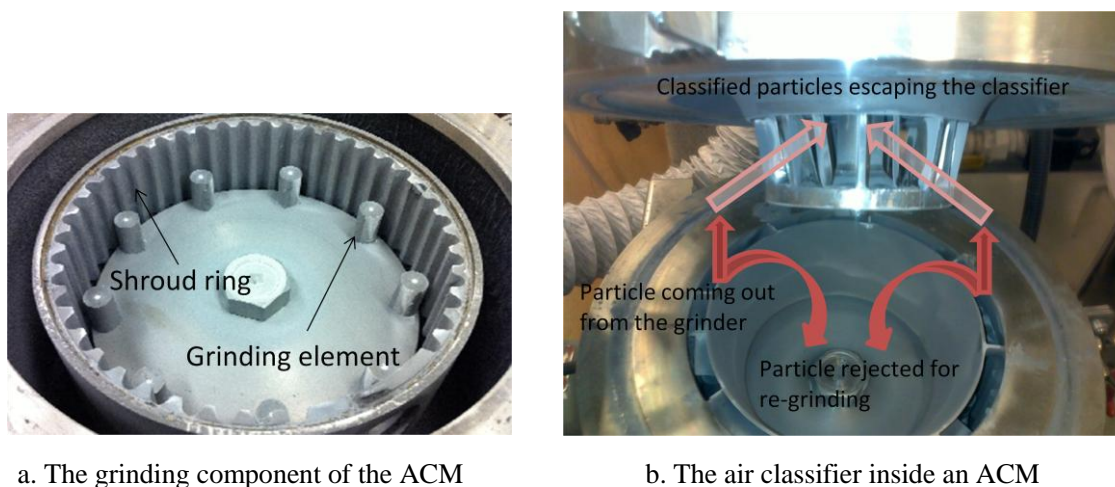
A typical mechanical mill for powder coating manufacture – The air classifying mill (ACM)
